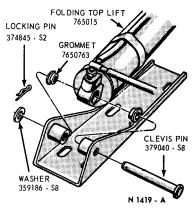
Folding Top Lift Cylinder Lower Pivot
